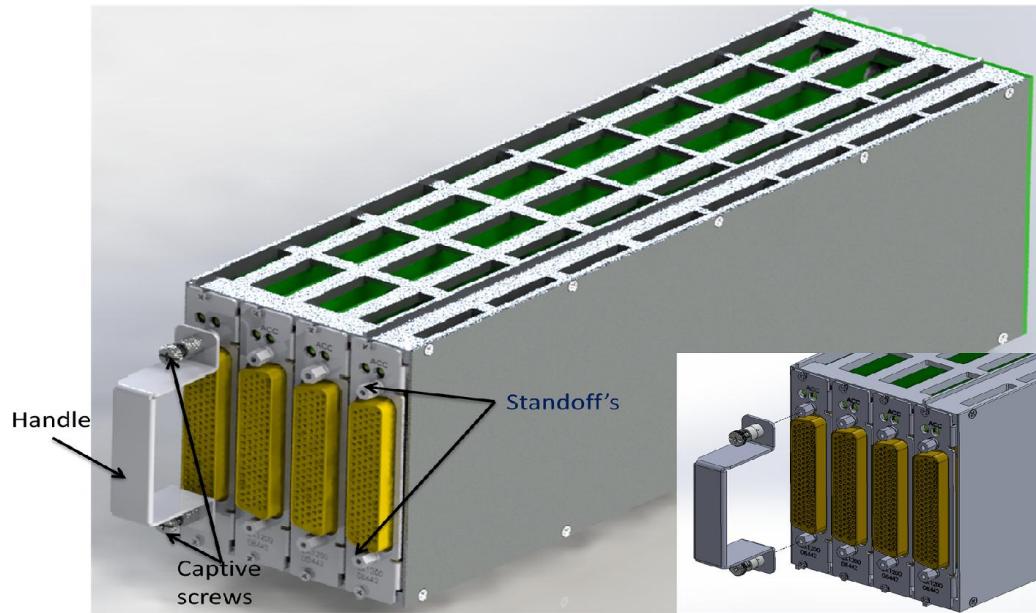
REMOVE IO CARDS FROM SMP-4 MODULE DIAGRAM
